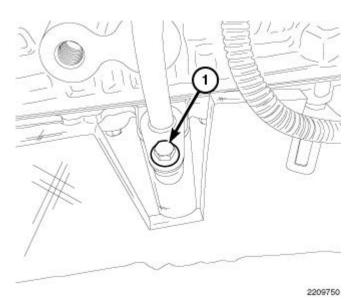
Oil Indicator Lower Bolt Courtesy of CHRYSLER LLC
